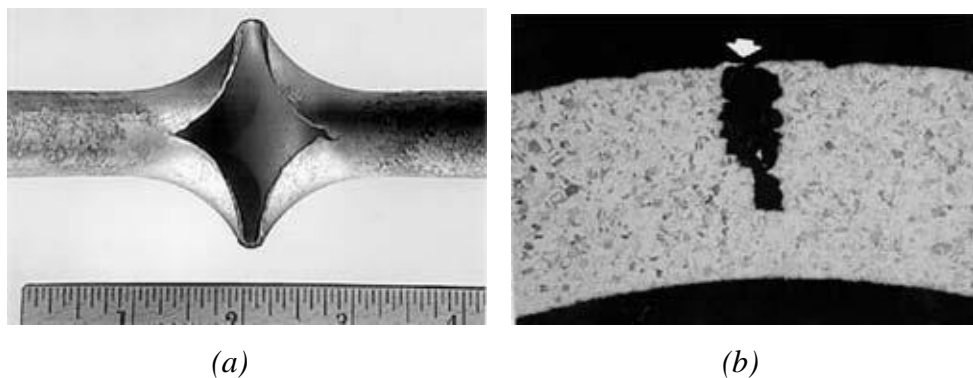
Broken tubing by pitting corrosion (a), and cross section of a pit (b). [5]
